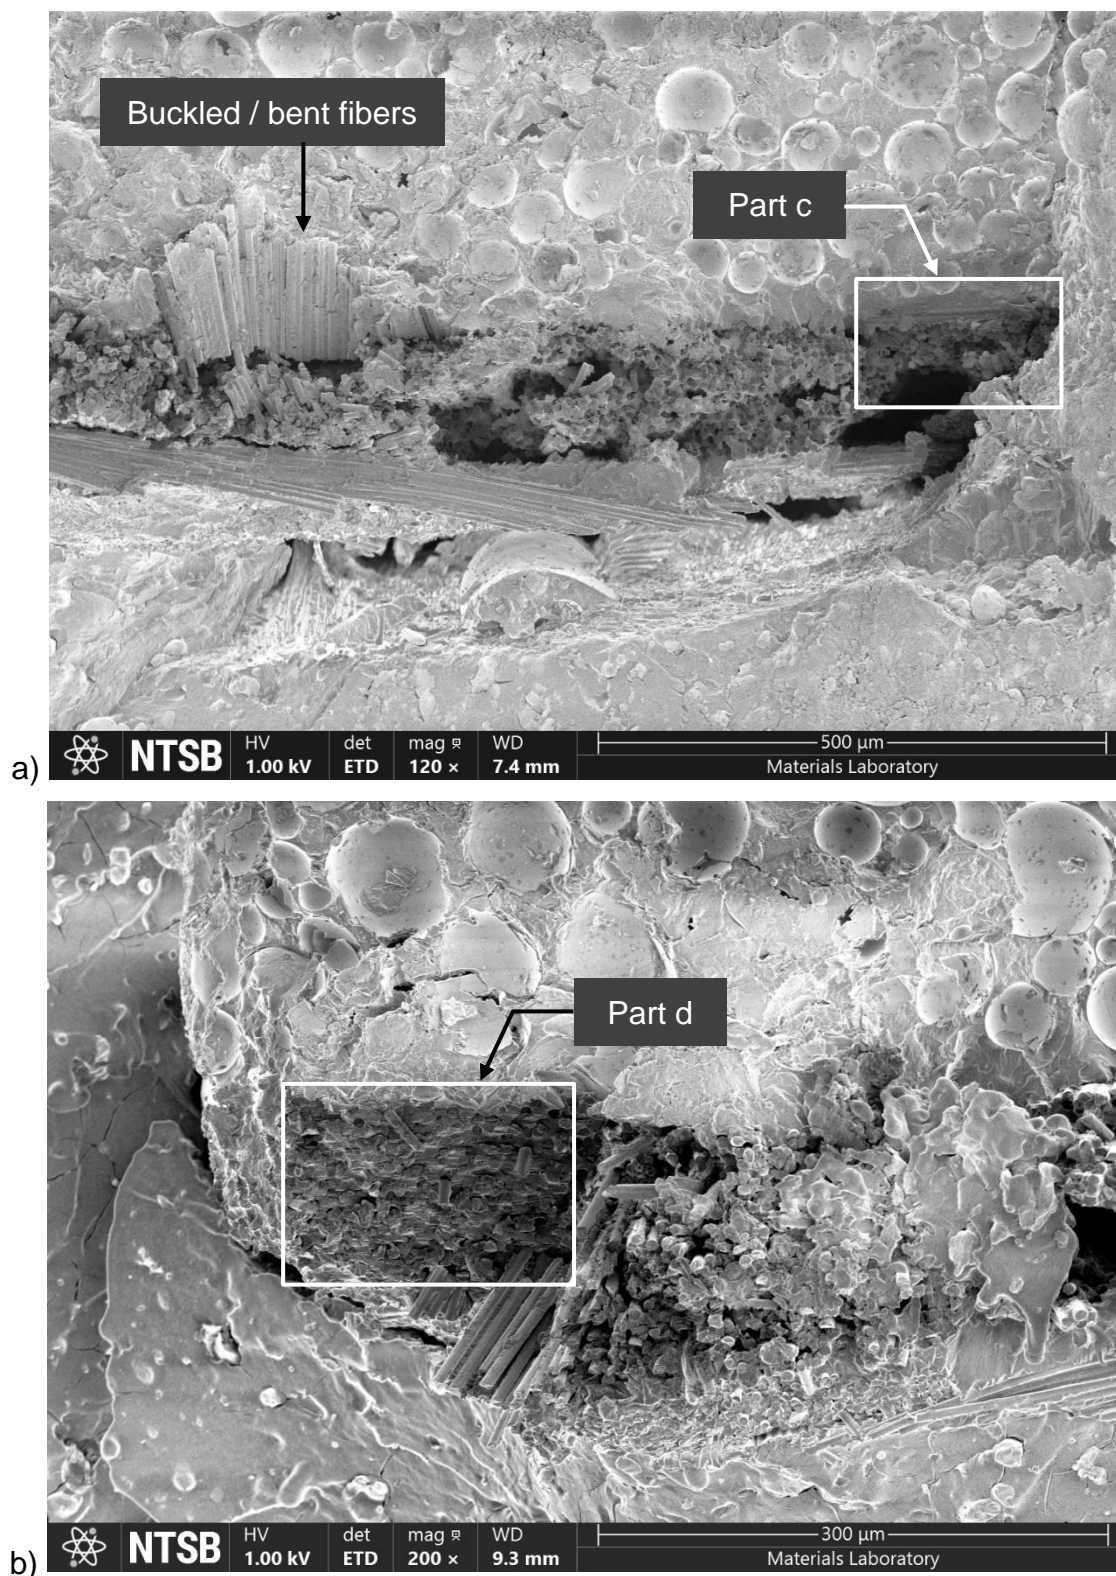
SEM images of the spar / afterbody fracture at the lower surface, inboard end, outer ply: a) afterbody-side of fracture; b) spar-side of fracture;
